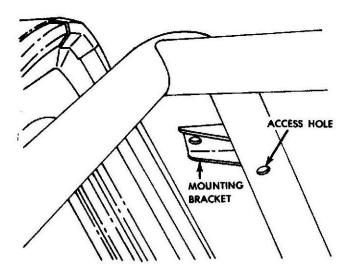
Roll Bar Access Hole (L. H. Shown)
